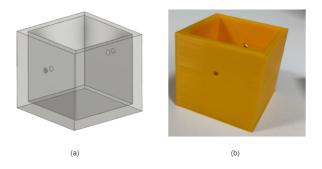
(a) Single vessel Mold Design (b) 3D printed Mold
